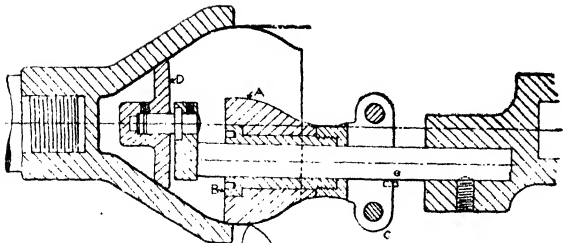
COMBINED PRESSURE PALLET AND FORMING ROLLER MANIPULATED FROM LOOSE HEAD
